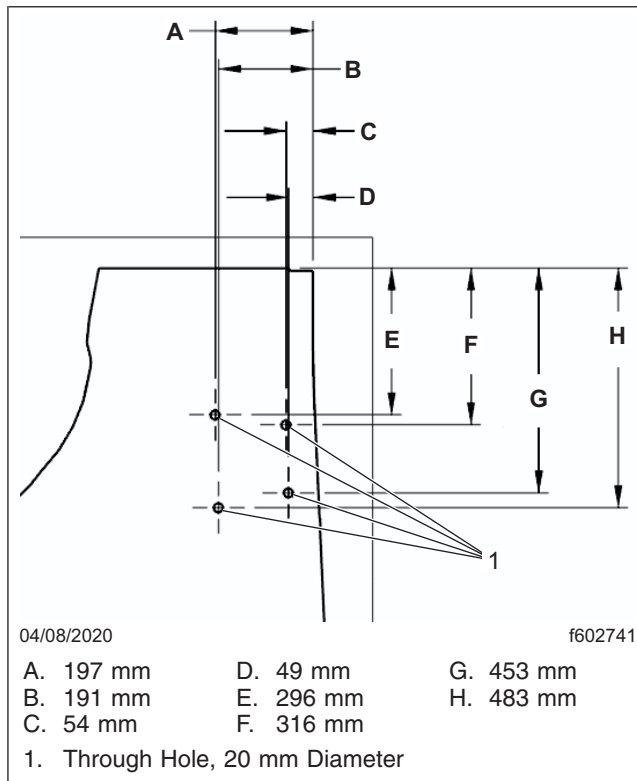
, Push Nut Hole Dimensions, RHD Vehicles
